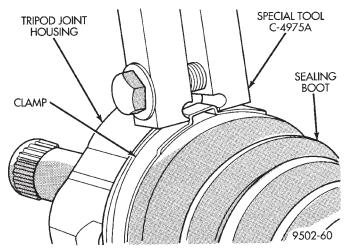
Crimping Tool Installed on Sealing Boot Clamp
